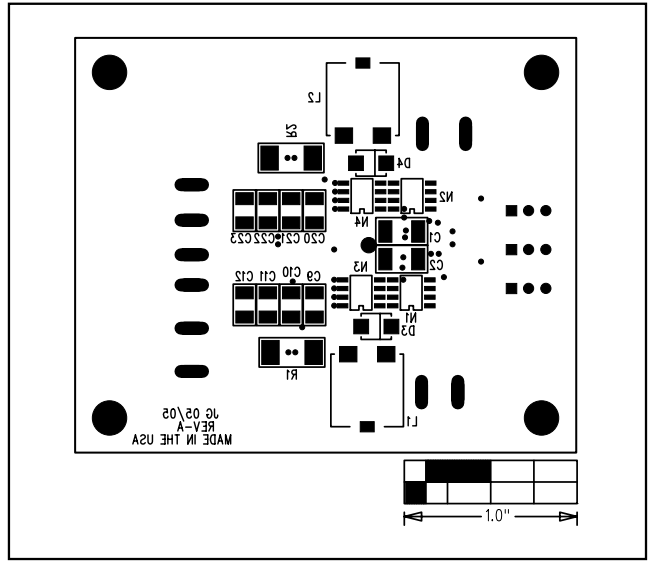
MAX5066 EV Kit Component Placement Guide—Solder Side
